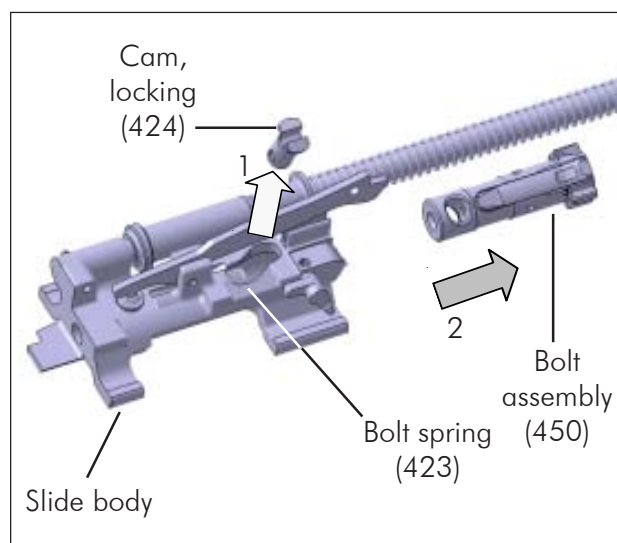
g - Removal of the bolt assembly and the cam, locking (424)
